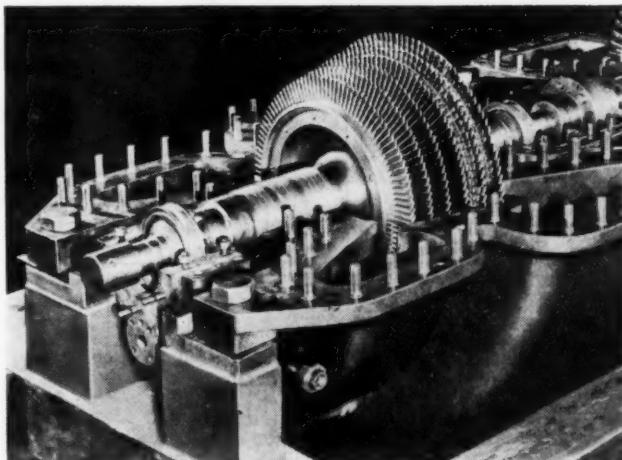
GAS TURBINE WITH TOP CASING REMOVED
